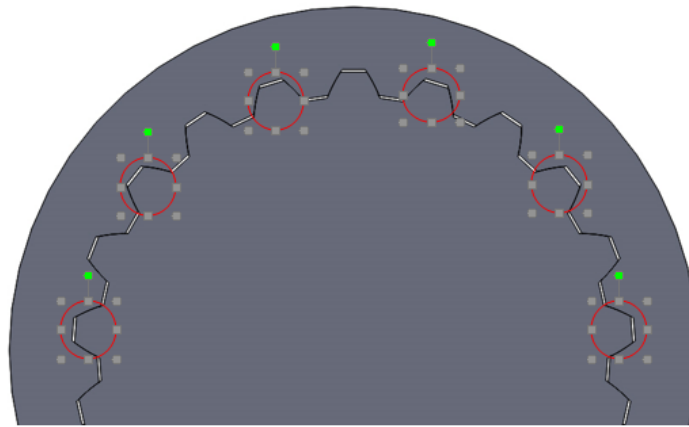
Three dimensional side fitting of spline mesh (magnifying)
